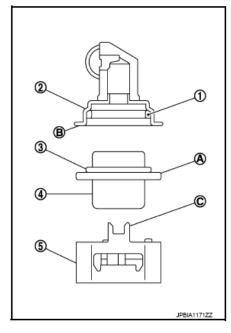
Identifying Fuel Damper, O-Ring, Cup, Clip And Cut-Out Courtesy of NISSAN NORTH AMERICA, INC.
